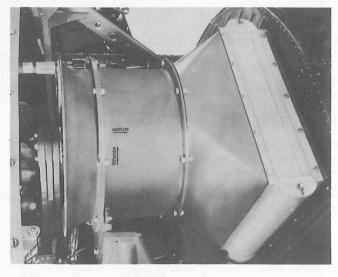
Main Gear Box Oil Cooler and Blower Installed
